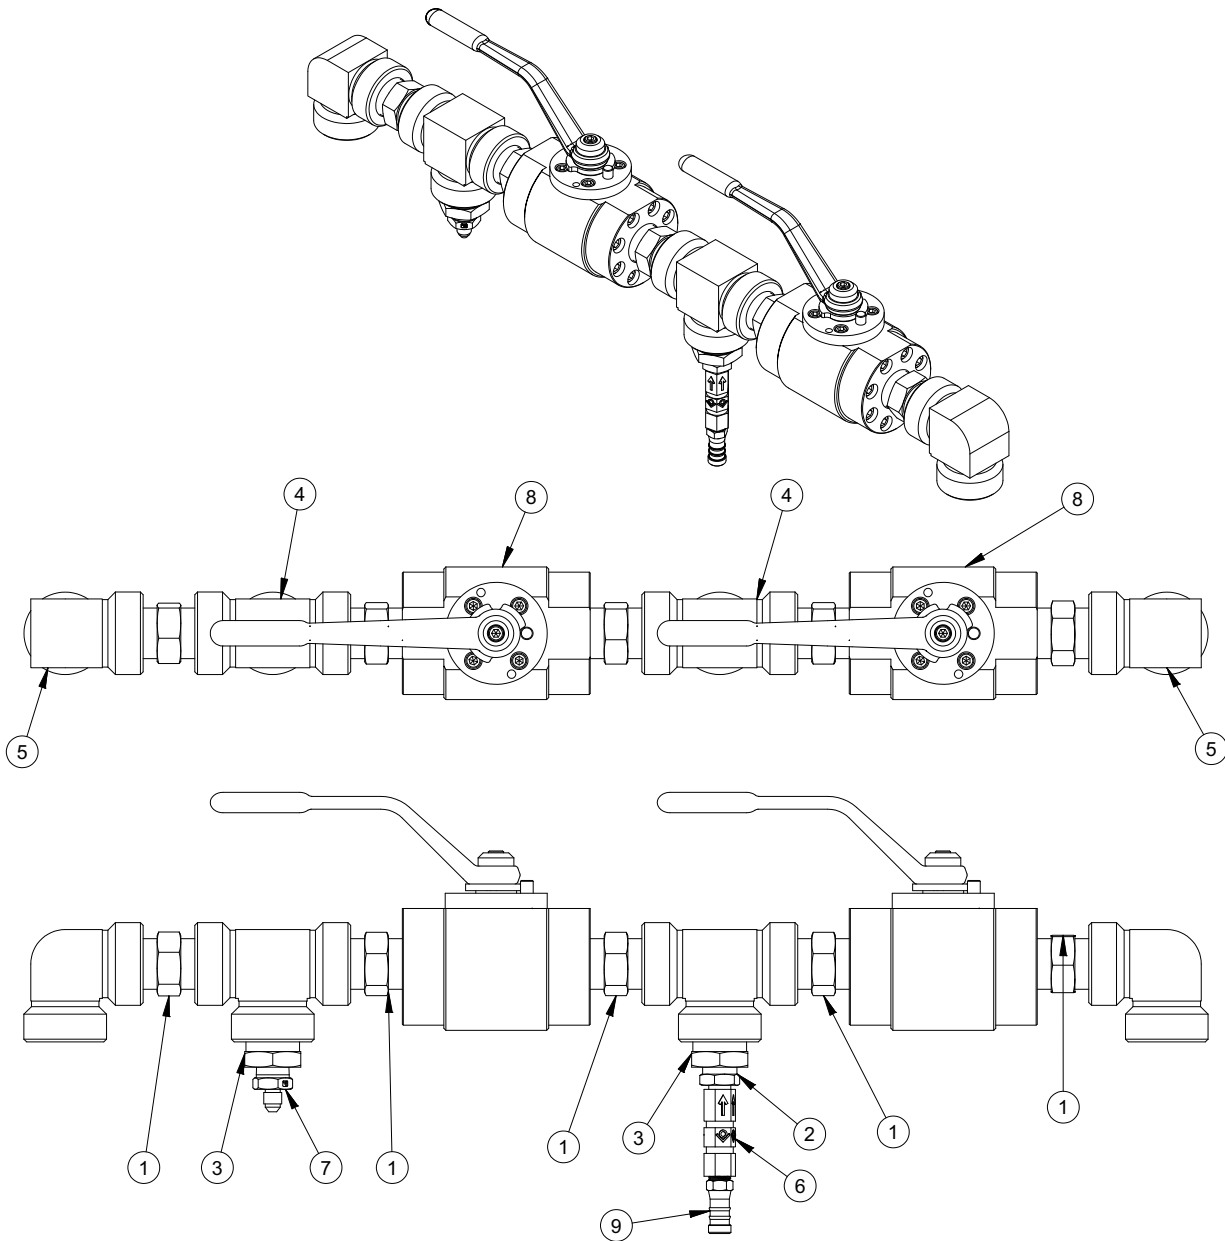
CONSOLE INTERLOCK ASSEMBLY (P/N 98223)
